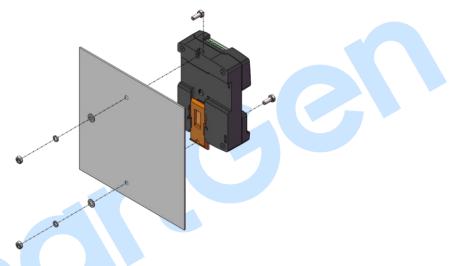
CMM366B-4G/CMM366CAN-4G Screw Installation
